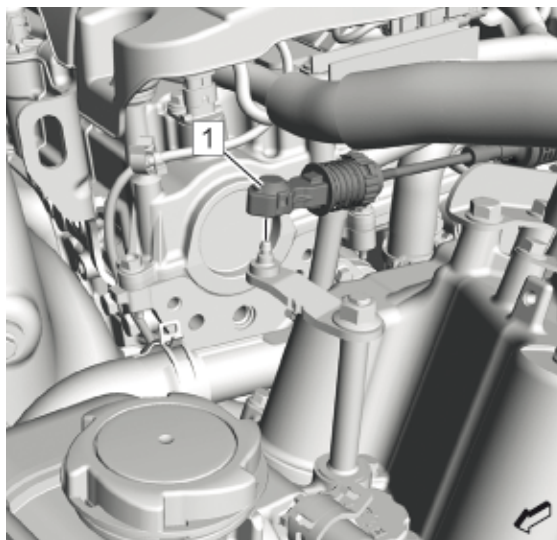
Range Selector Lever Cable And Range Selector Lever Cable Lever
